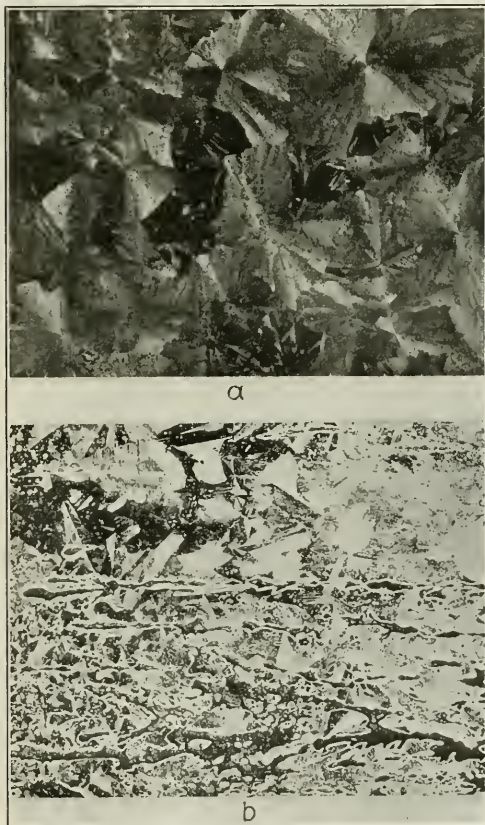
SURFACE APPEARANCE OF HOT-DIPPED SHEETS
